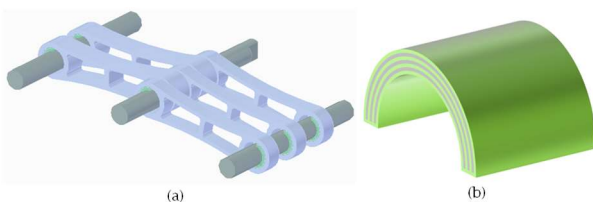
(a) 2+3 Chain link configuration, (b) Elastomer bearing [5]
